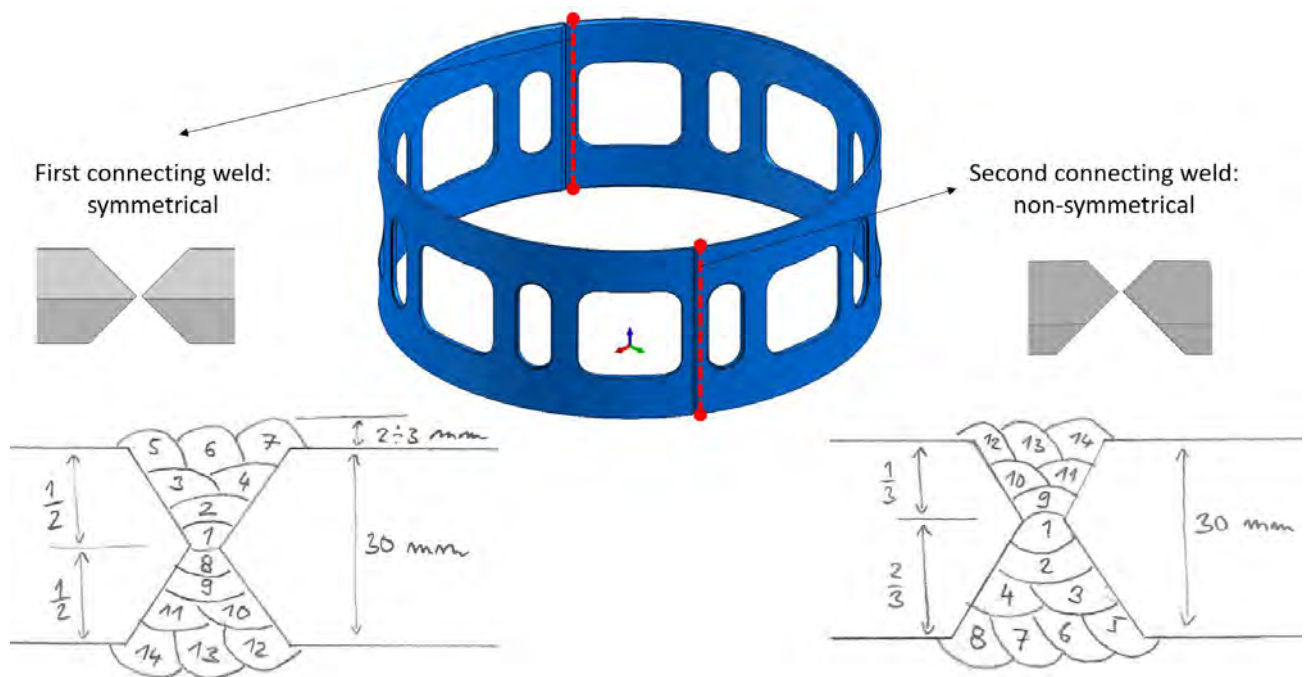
Connecting welds of the outer cylindrical shell, the corresponding bevel shape and layout of weld passes
